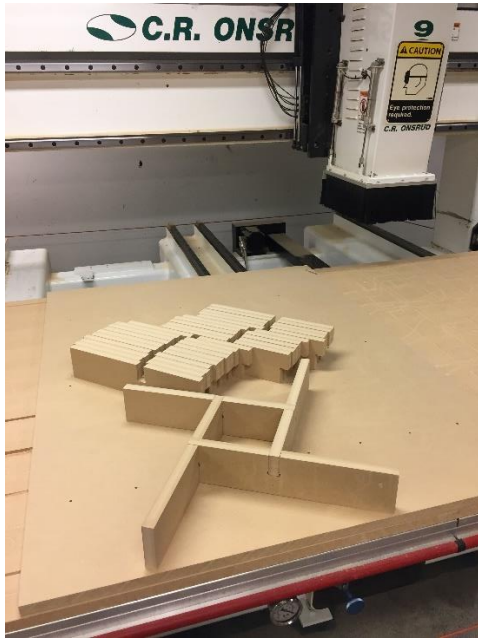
reciprocal modules are fabricated for structural testing using 3-Axis CNC machine.
